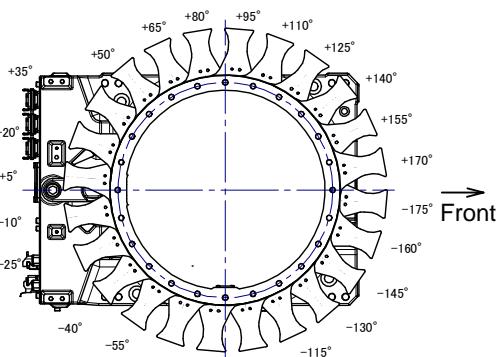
(f) Mounting the J1-axis adjustable mechanical stopper (2/3)
